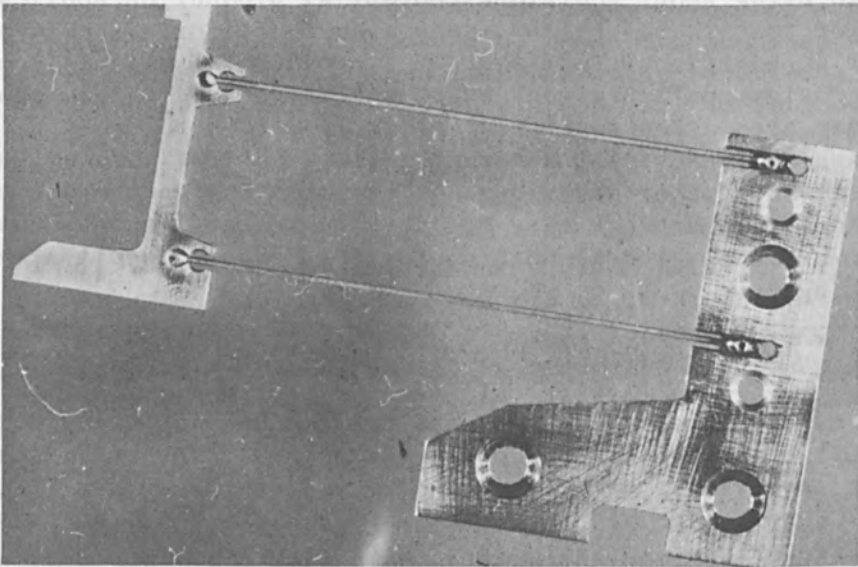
A 2203 Hammer assembly after EB welding.
